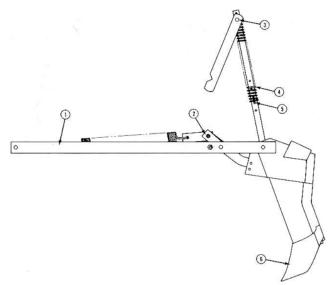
Hoe Assembly: (1) Drag Bar, (2) Spring Trip, (3) Depth Adjusting Clip, (4) Pressure Spring, (5) Pressure Adjusting Clip, (6) Hoe Opener.
